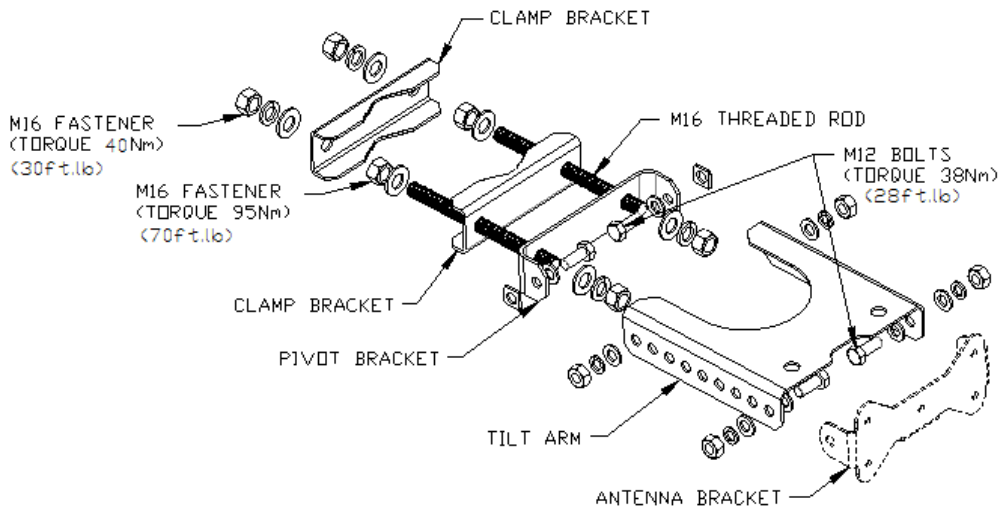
Exploded Assembly for Upper Mounting Bracket using Clamp Bracket
